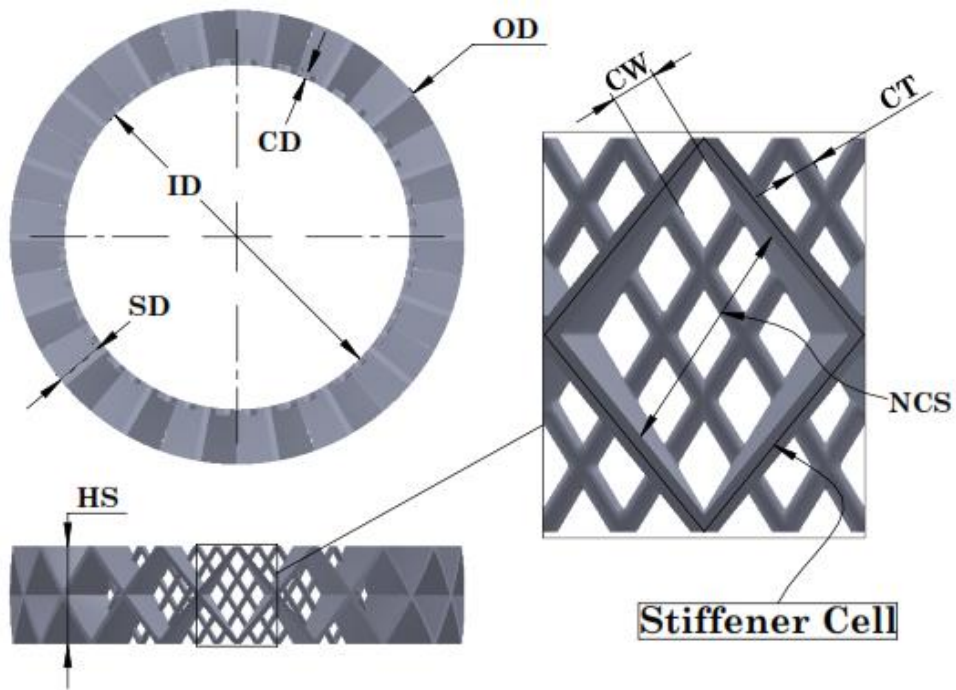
Geometric parameter (all in mm) of the 8 cylindrical specimens.
